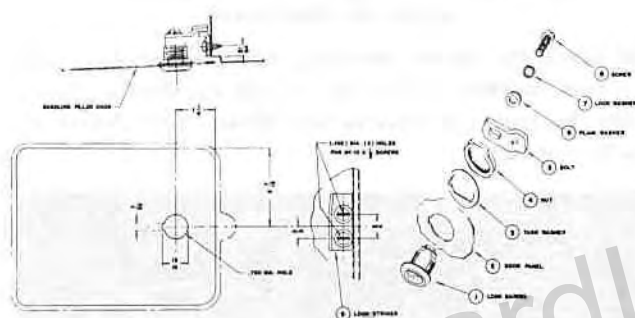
Layout of the Fuel Filler Door Lock Component Parts
